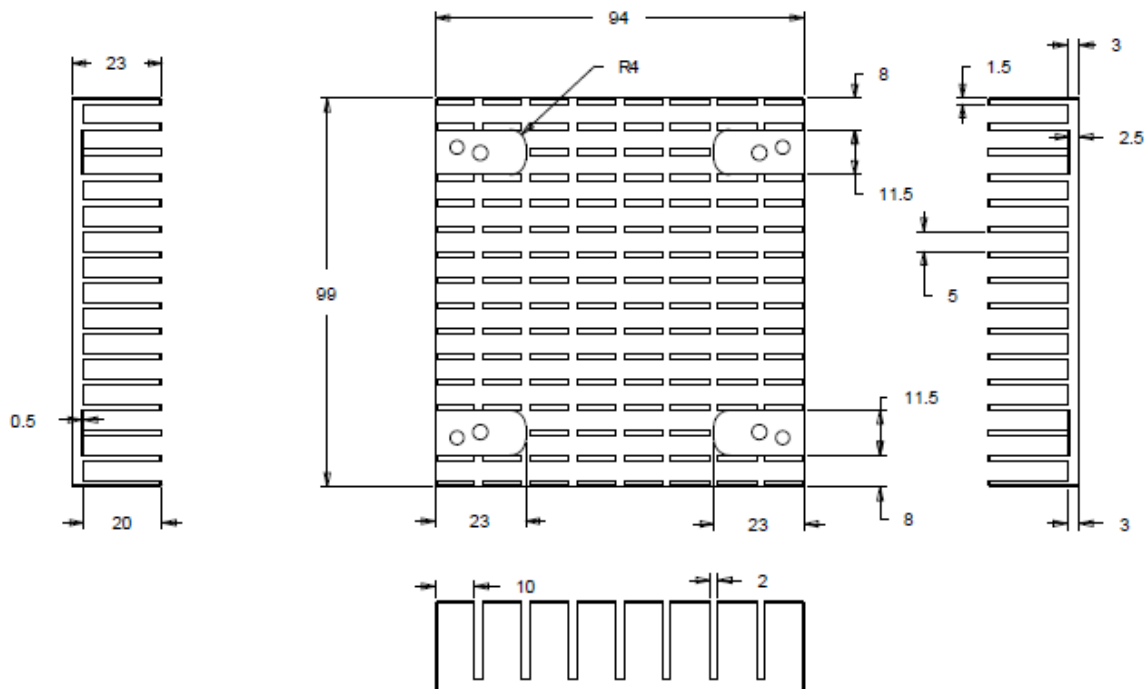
Dimensions of the Heat sink when viewed form Bottom and Side View
